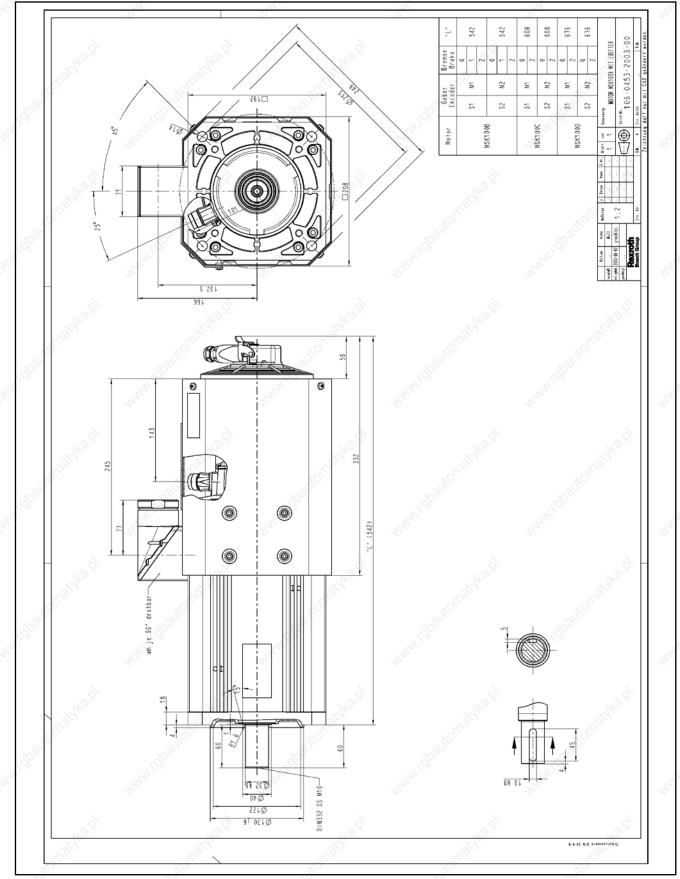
Dimension sheet MSK100 with axial fan unit
